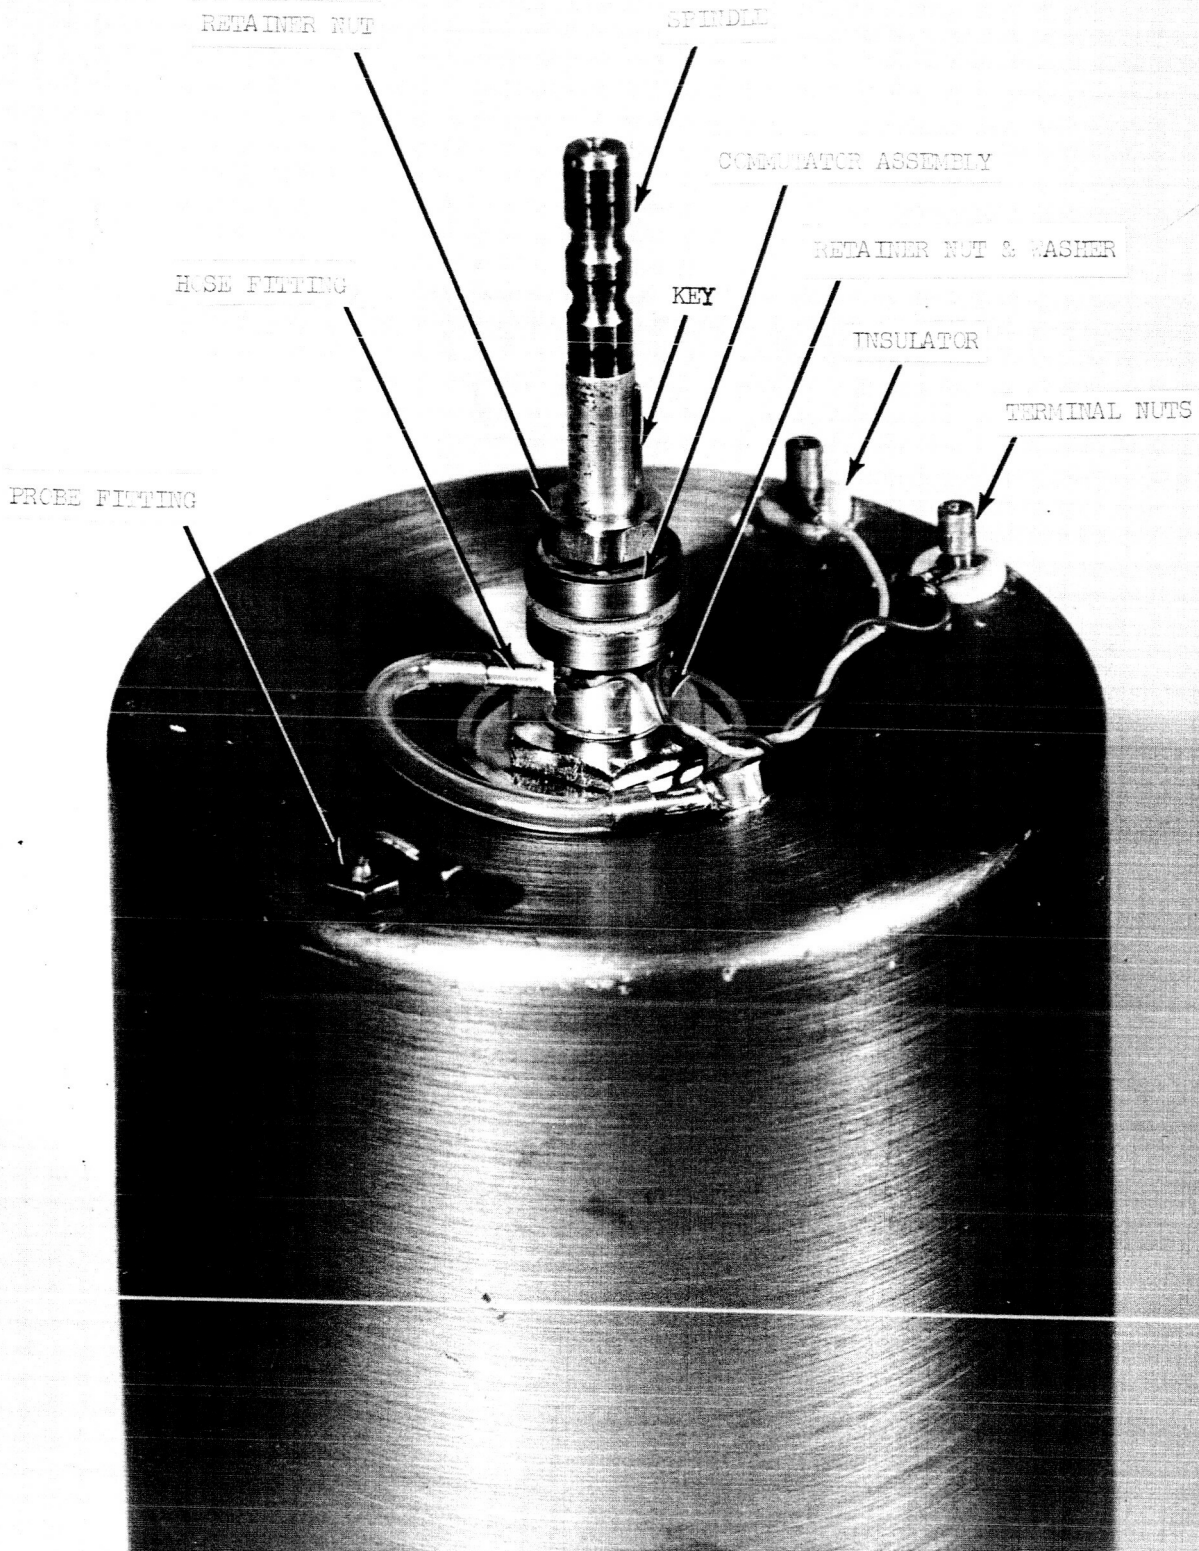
VIEW OF SPINDLE END OF BOWL ASSEMBLY
